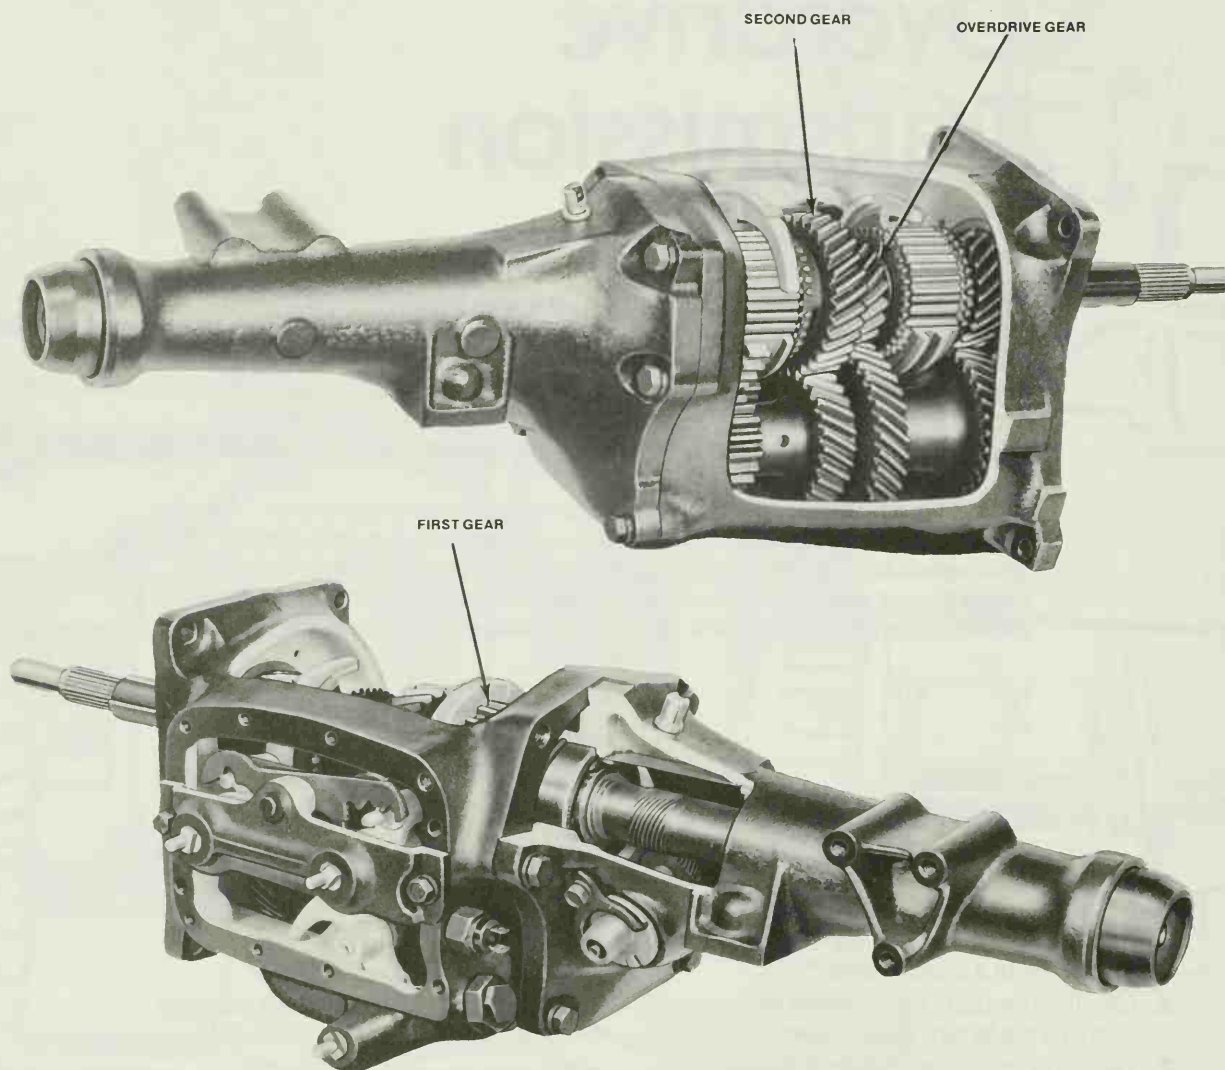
A four-speed overdrive transmission. (Chrysler Corporation)
